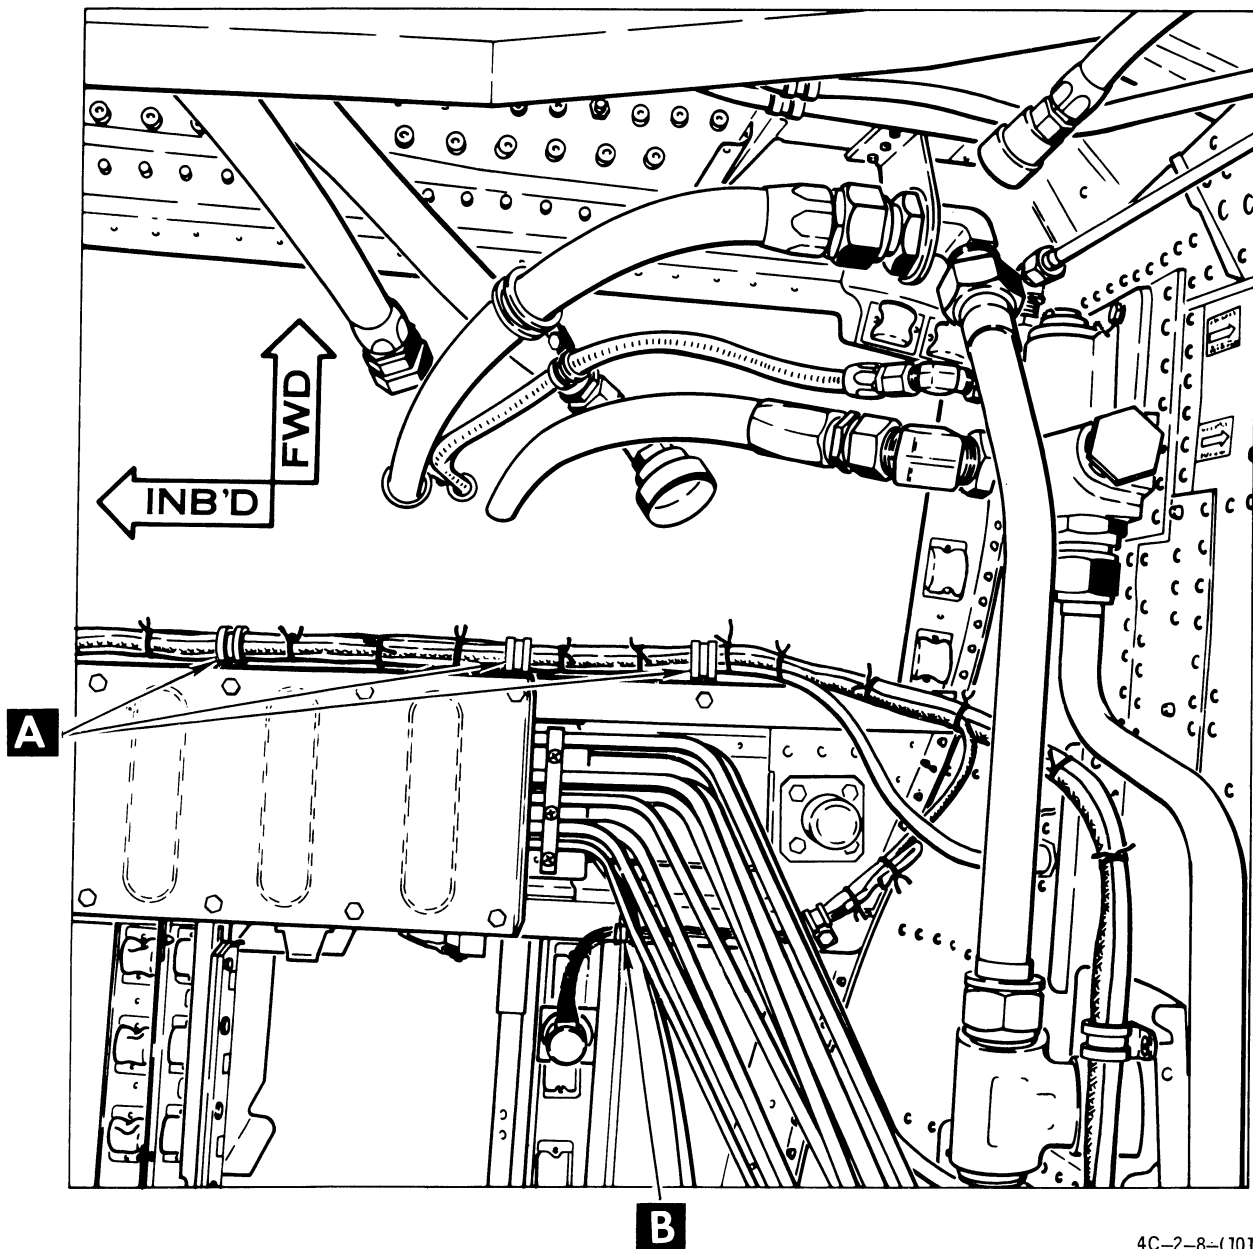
Right Engine Bay Zone G (Sheet 7 of 8)
